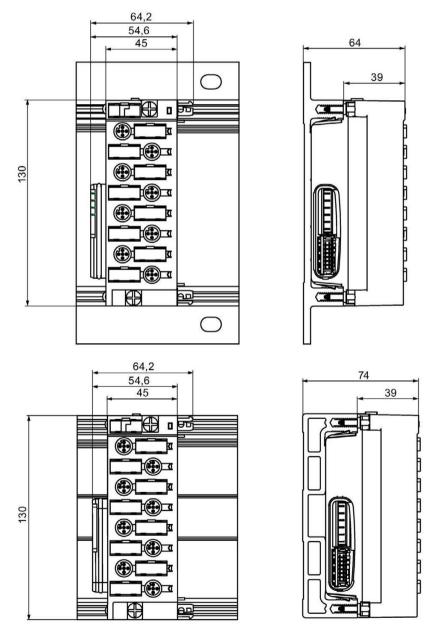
Dimension drawing of an electronic module with CM IO 8 x M12 connection module
